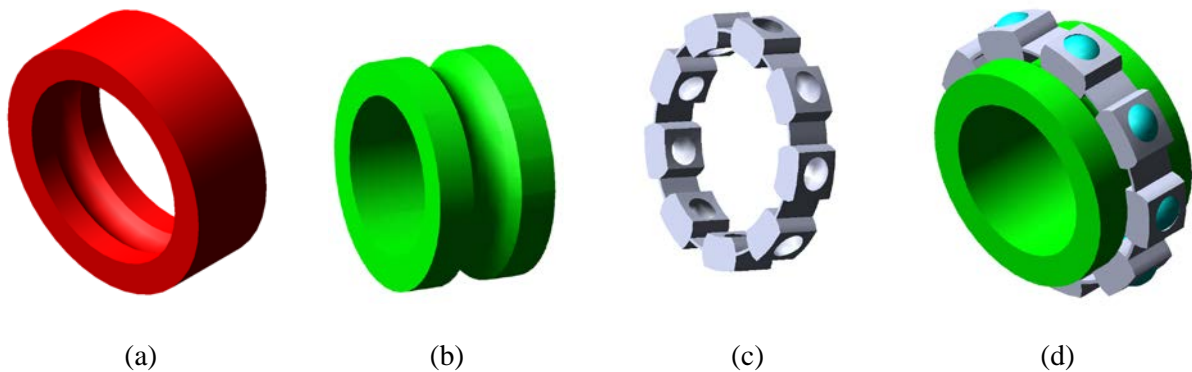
ADAMS MBS model of deep groove ball element bearing test rig.
